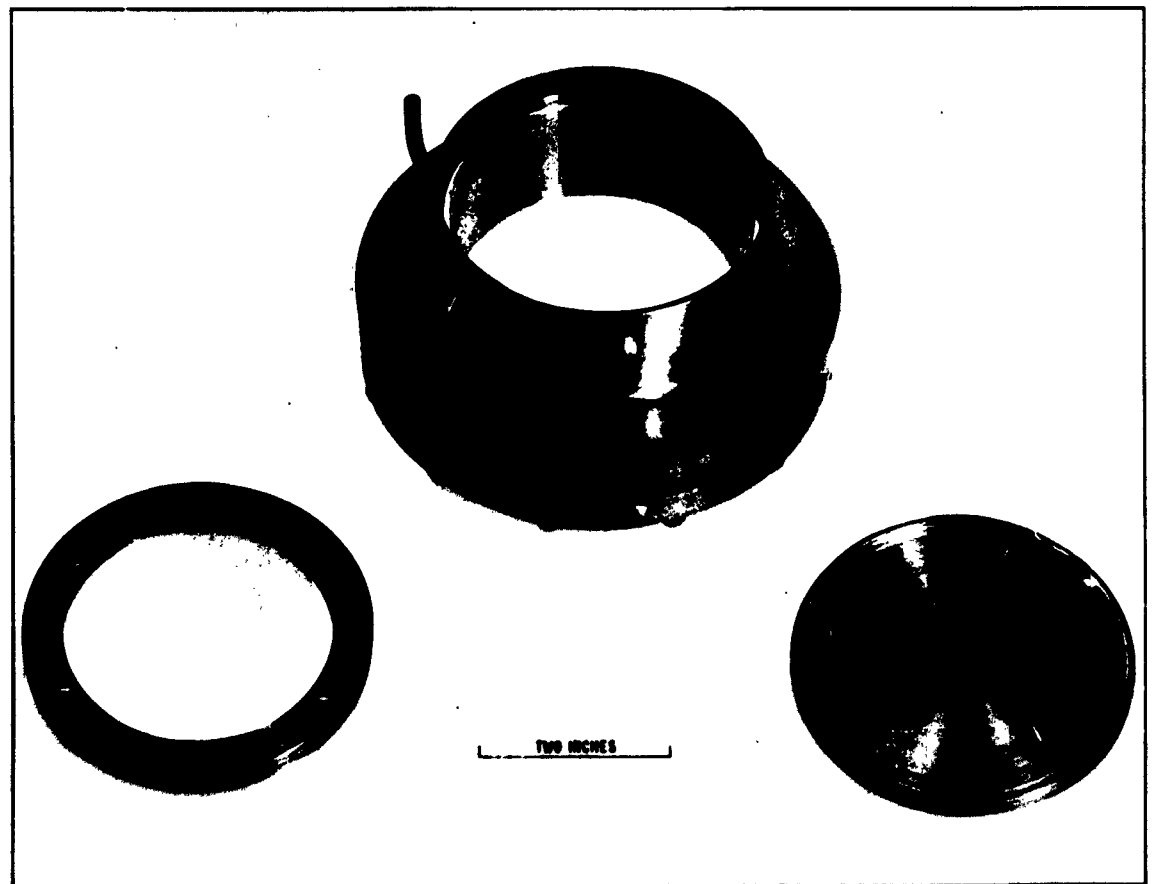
EXPLODED VIEW OF INDIUM SEAL.
